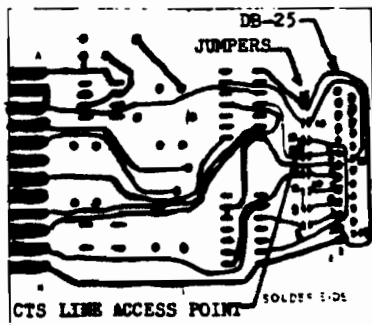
Solder side view of circuit board depicting jumper number and DB-25 pin-out.
